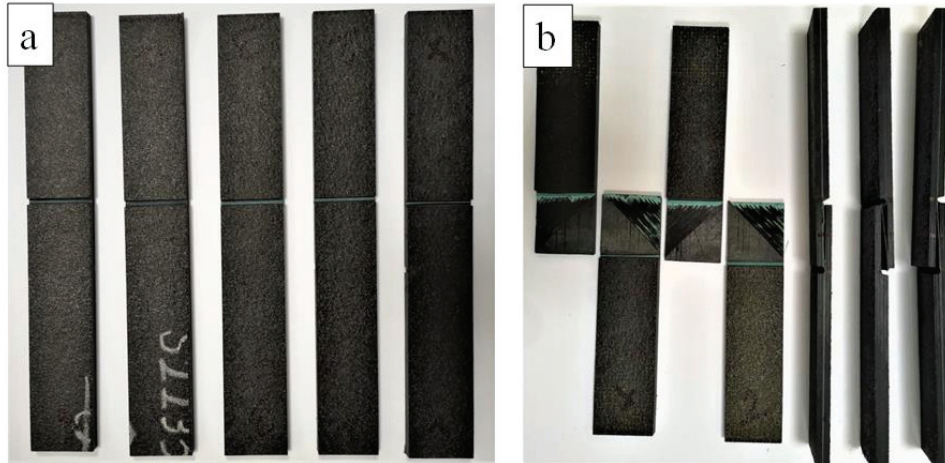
4. Single lap shear test specimen C (laser surface modification with 0.25 mm laser offset distance) a) Before the test b) After the test (the fracture surface)
